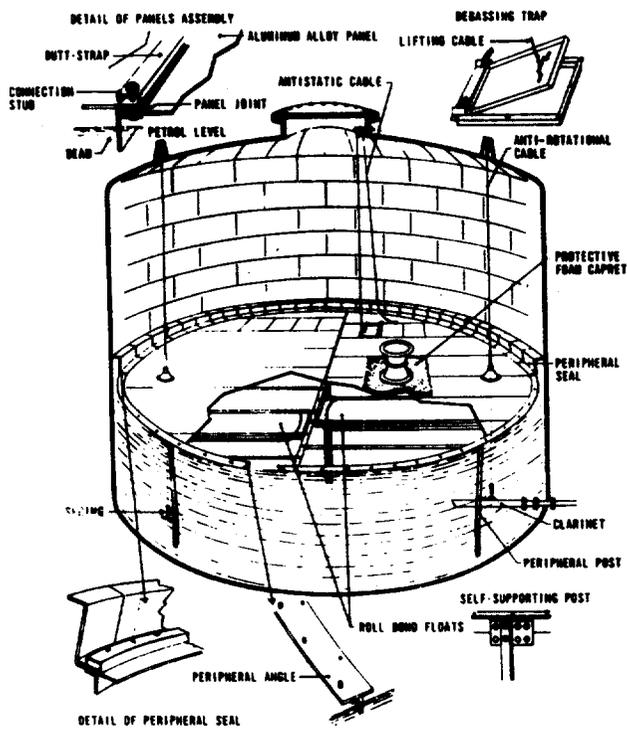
Fixed-roof tank with internal plastic floating blanket (Laroche Bouvier and Company, 5, Boulevard Edgar-Quinet, Colombes (Seine), France).
